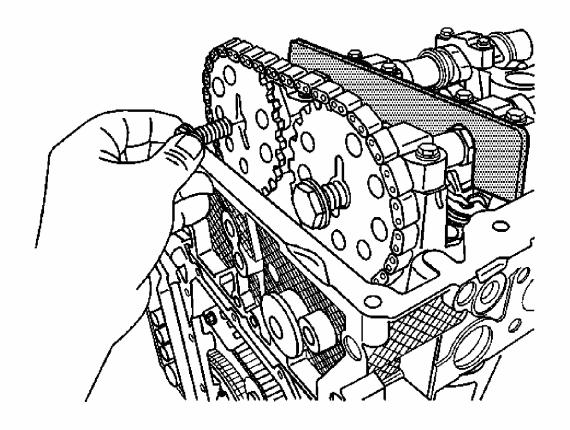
Identifying Left Intake Camshaft Sprocket Bolt Courtesy of GENERAL MOTORS CORP.
